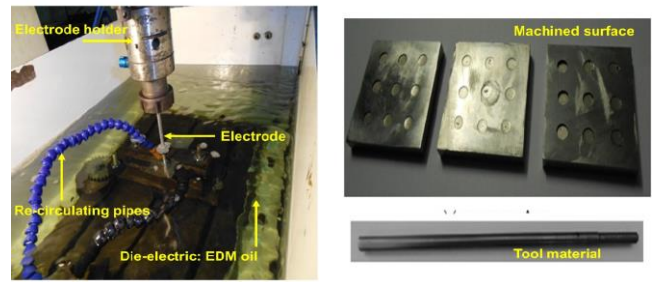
Schematic representation of machining operation and machined surface with tool material
